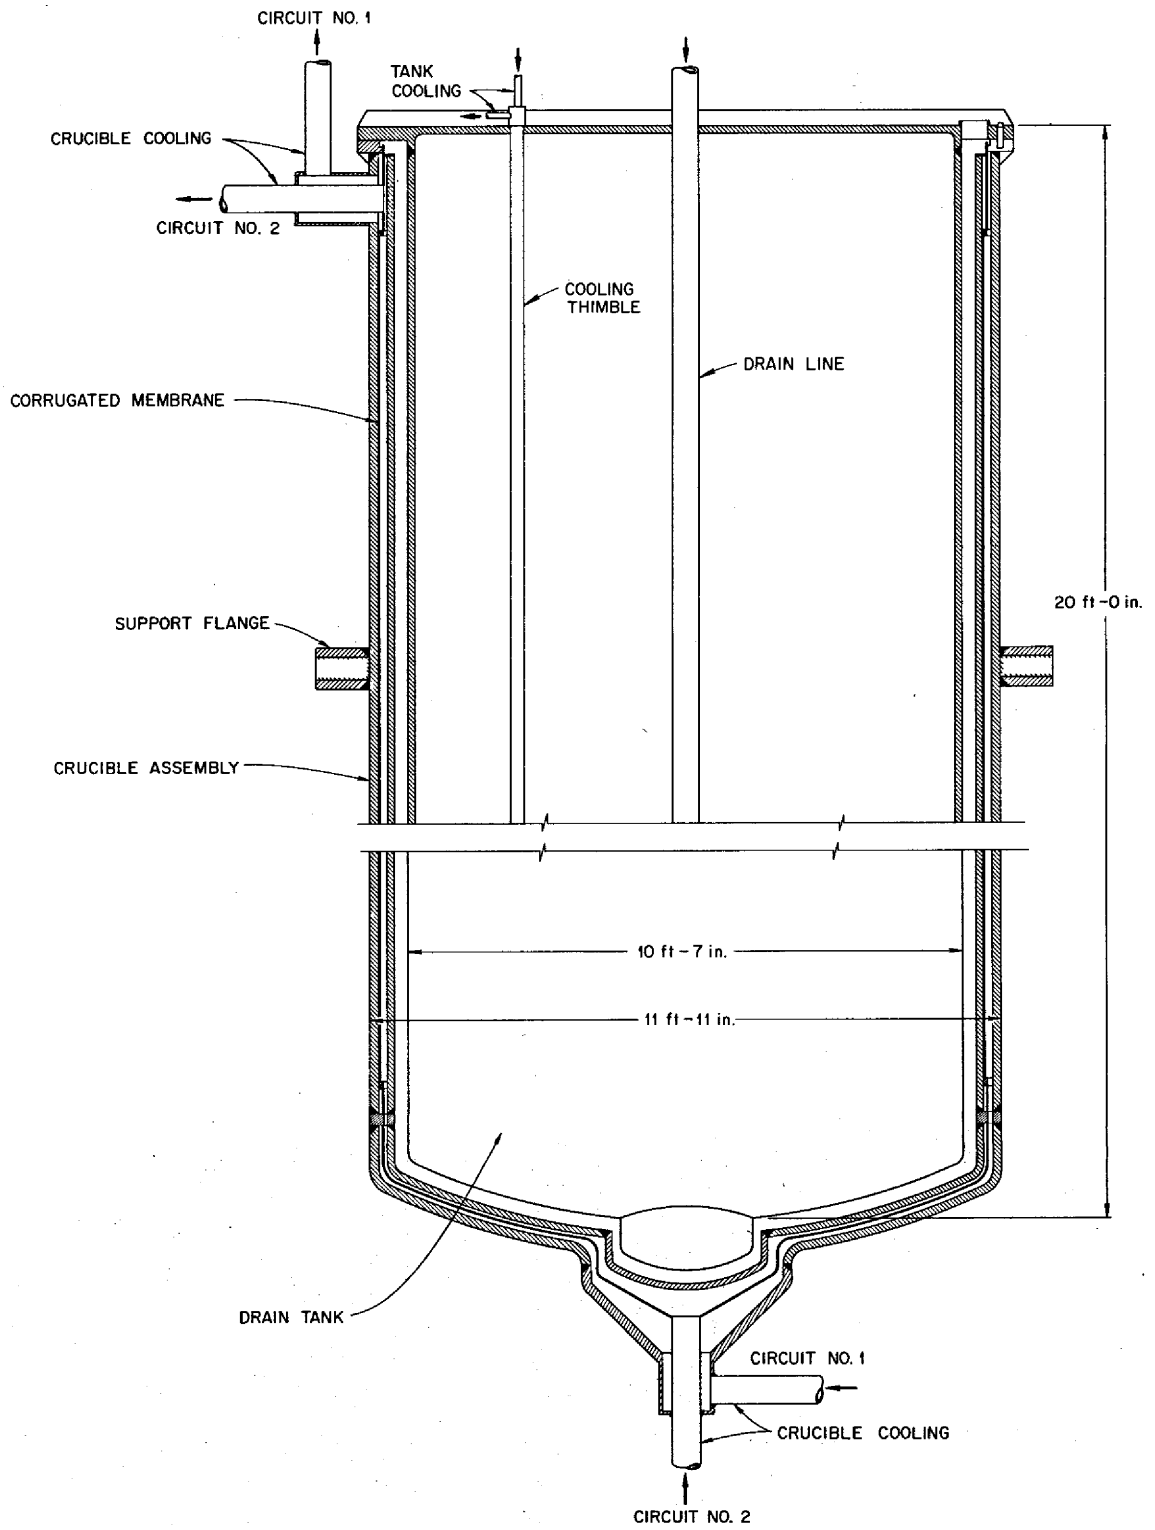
Elevation of Primary Drain Tank for 300-MW(e) Demonstration Plant.
